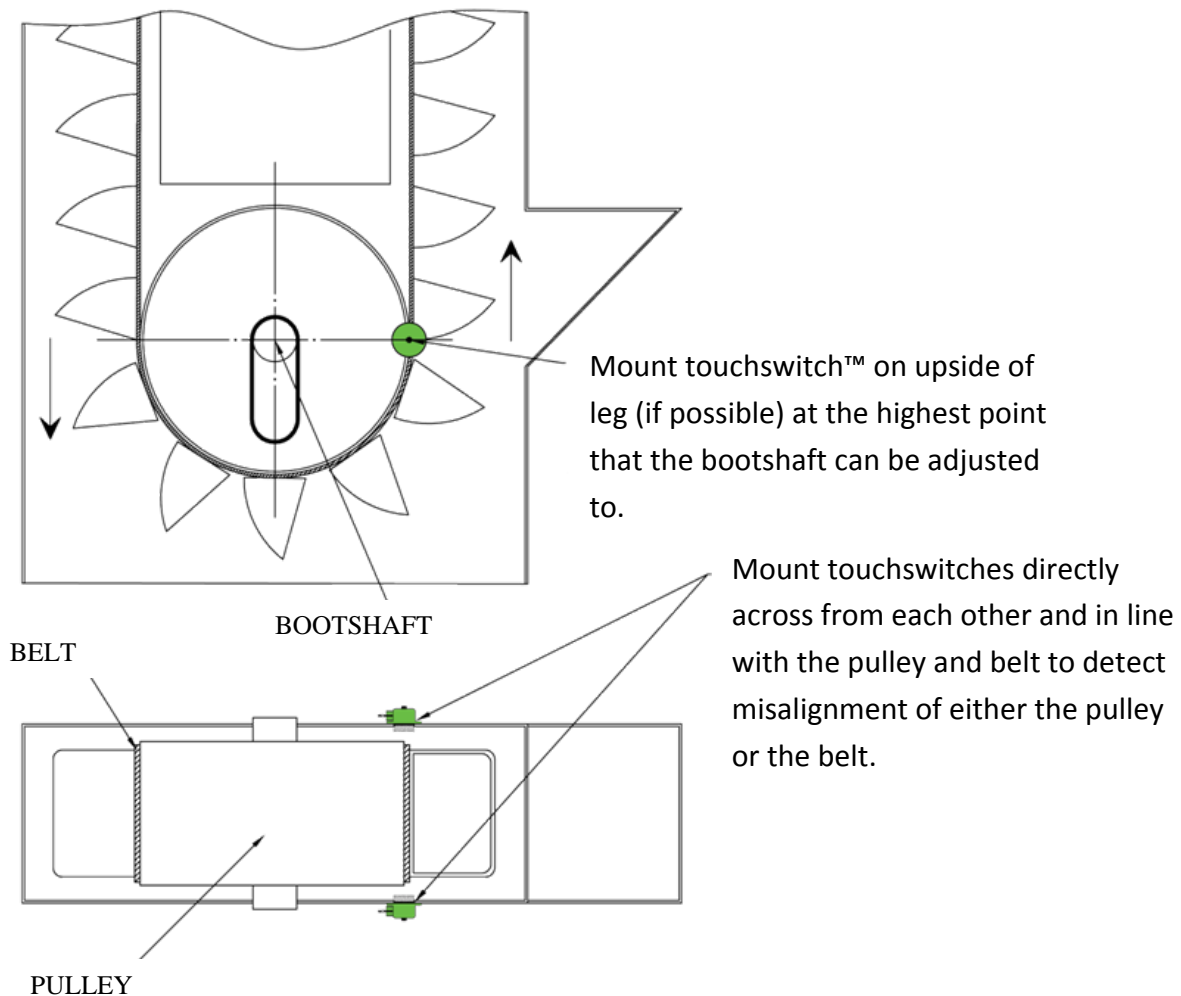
Touchswitch Mounting Position – Bottom Pulley
